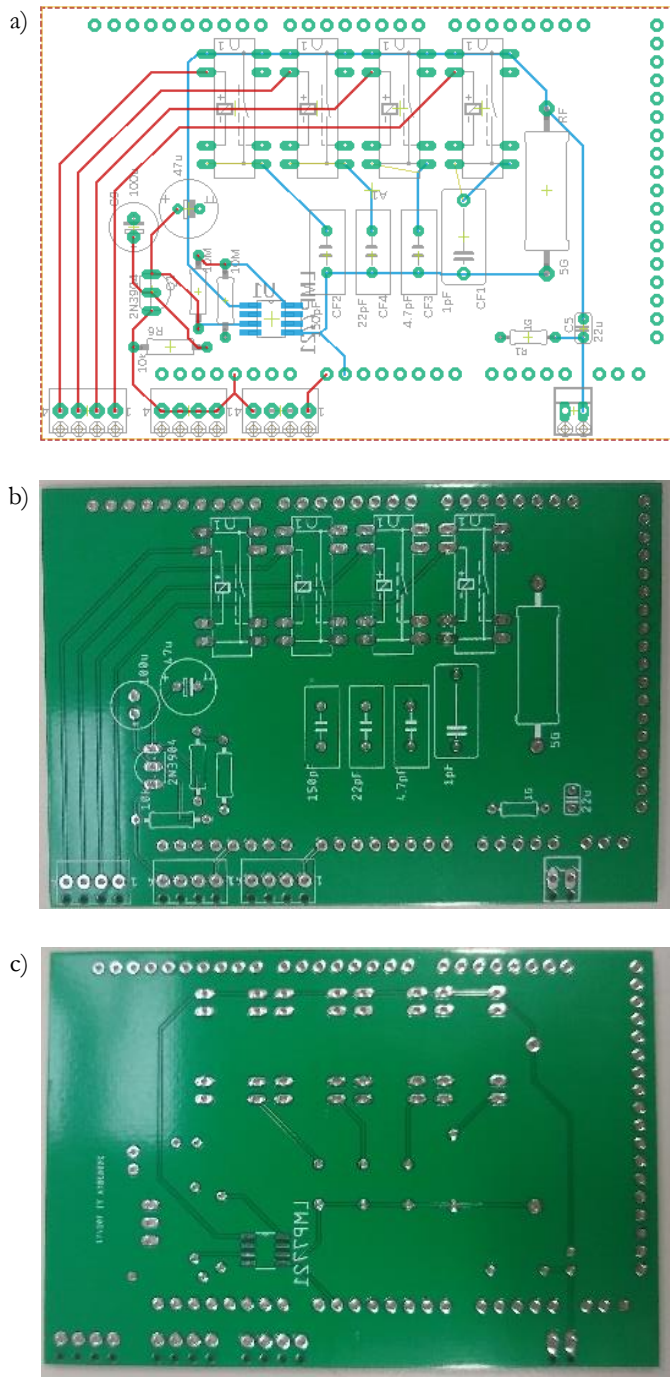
a) CAD design of the PCB and both sides of its realization printed by @JLCPCB.
